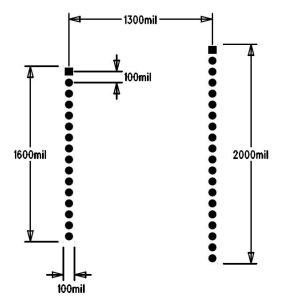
Board-to-Board Connector Dimensions for the Host Module
